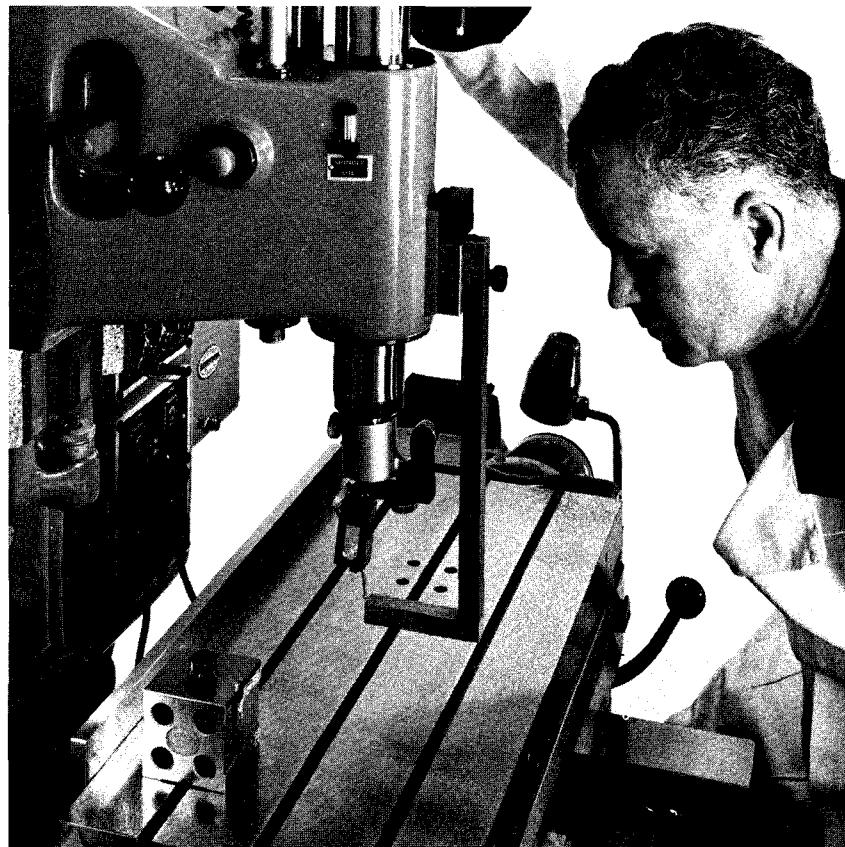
A special attachment which fastens to the front of the quill housing allows the indicator probe to be set on the spindle axis within .0001 inch [0.0025 mm] for faster alignment.
